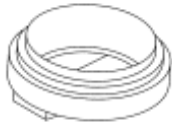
Installing Crankshaft Rear Oil Slinger Using Special Tool (303-517)
